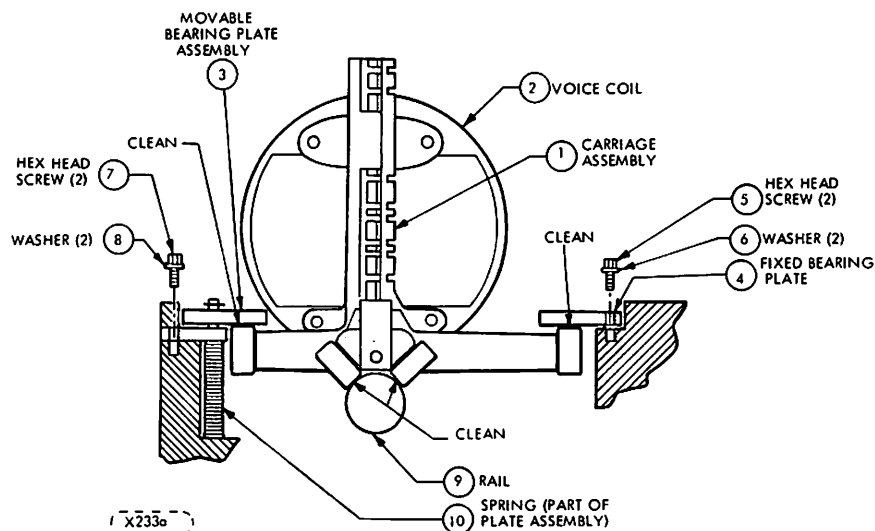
CARRIAGE RAILS AND BEARINGS
